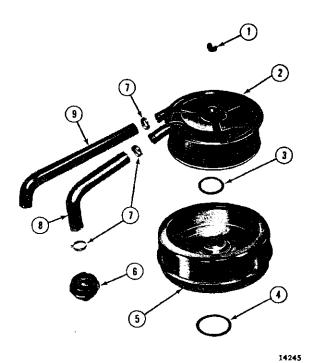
OIL BATH AIR CLEANER --DAUNTLESS V-6 ENGINE
